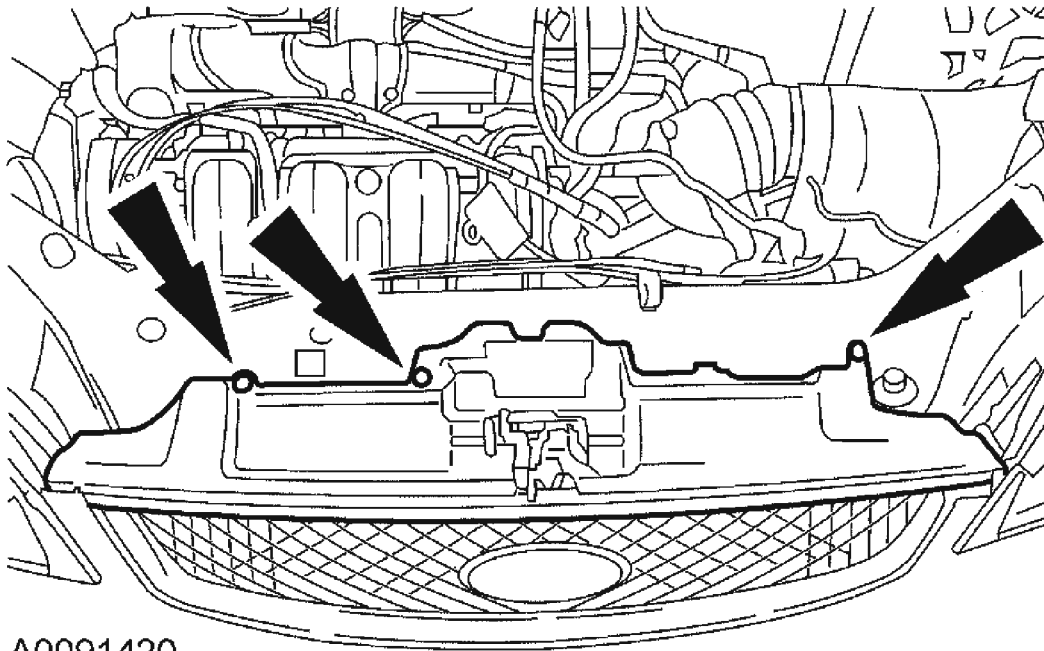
Removing Pin Type Retainers And Radiator Air Deflector
